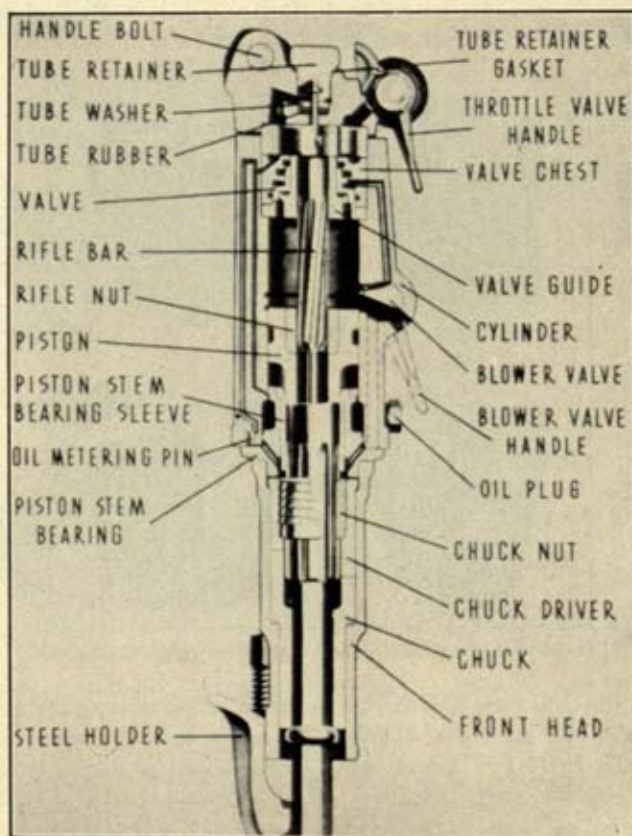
Section through a jackhammer. (Ingersoll-Rand Co.)
